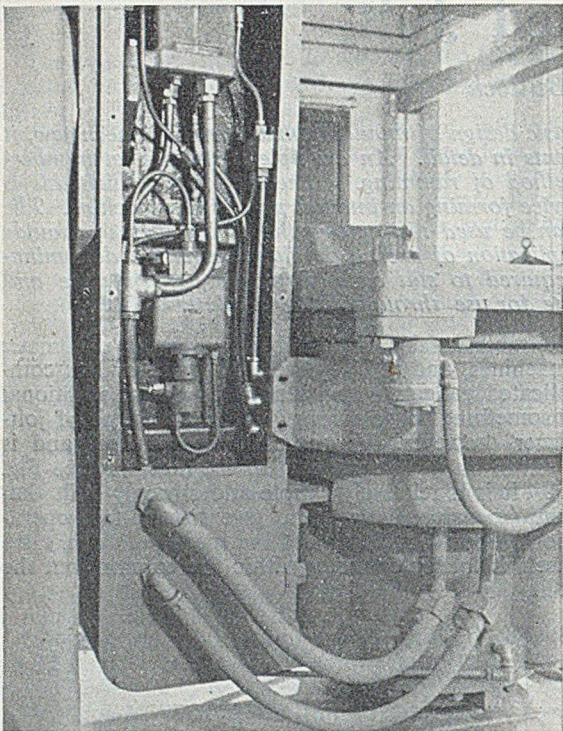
AND 3.—The Jolt Timer shown mounted in the Column of the Machine and (FIG. 3) Door closed with the Setting Knob ready for Operation.
